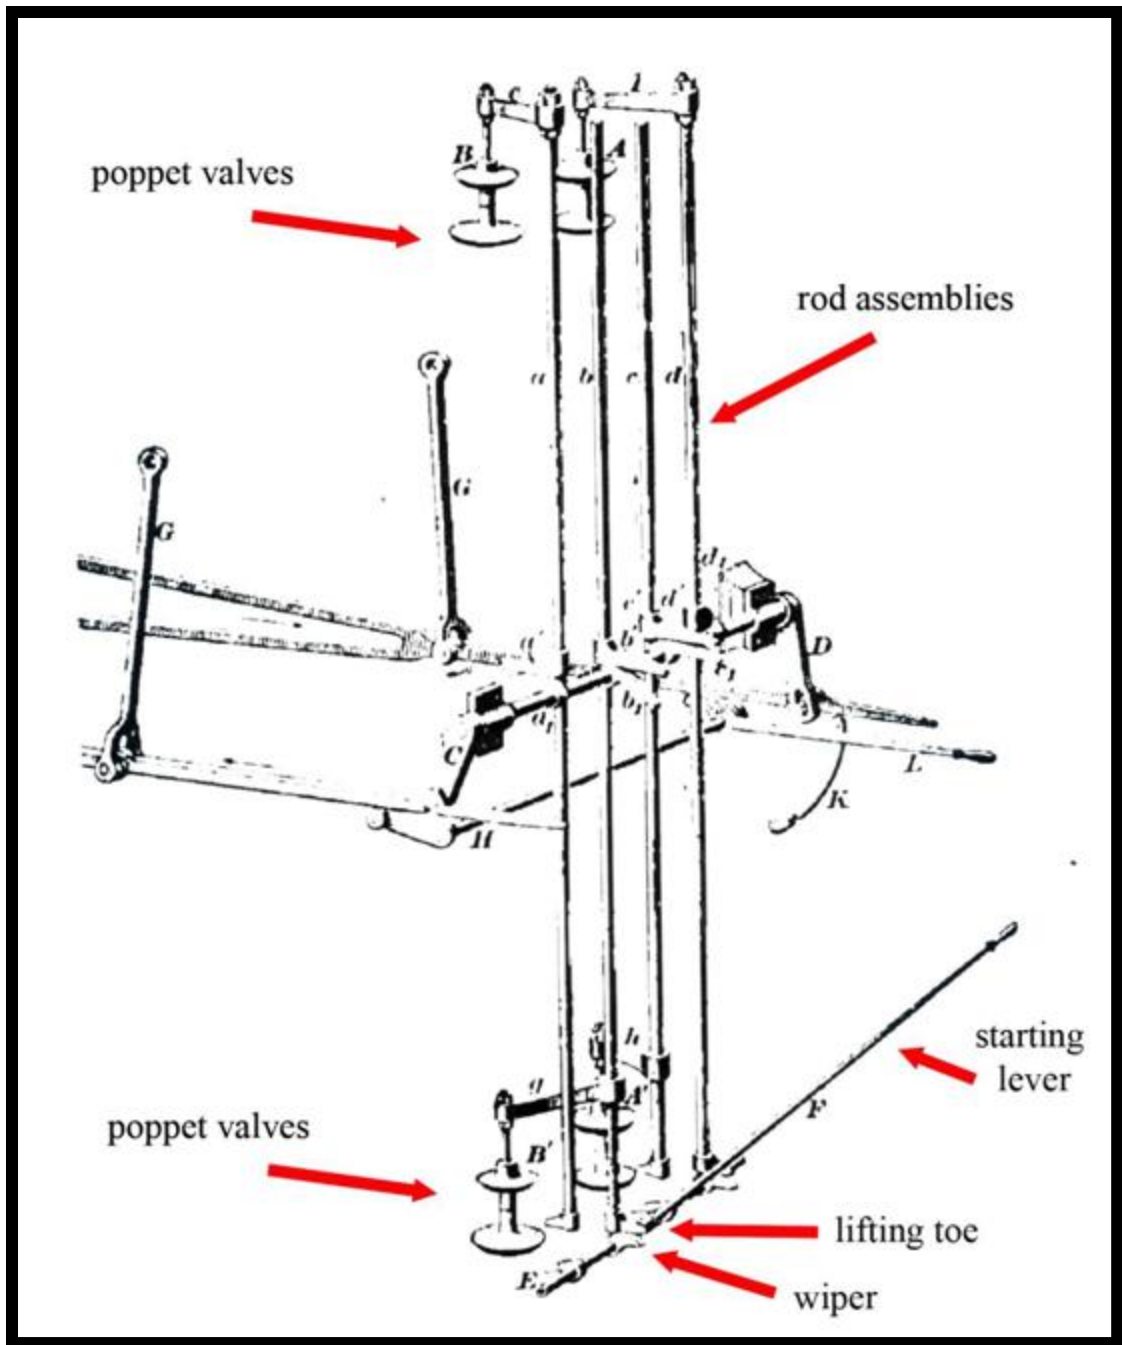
Lifting rod and poppet valve assemblies. The steam chest has been omitted to view the assemblies; modified from International Correspondence Schools (1897:69, fig. 331).
